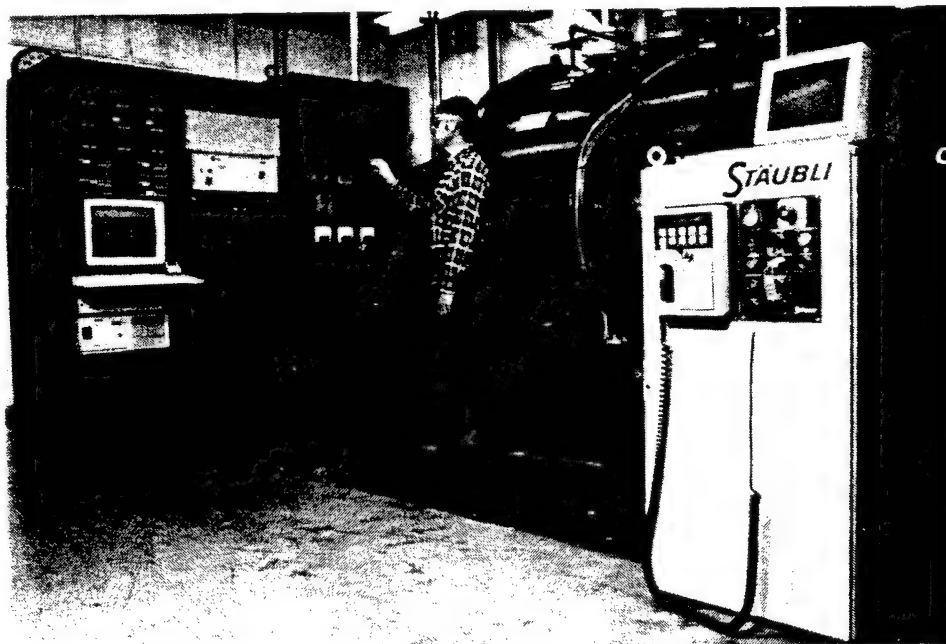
Overall View of Spray Casting Equipment During Wear- and Corrosion-Integrated Test Series.
